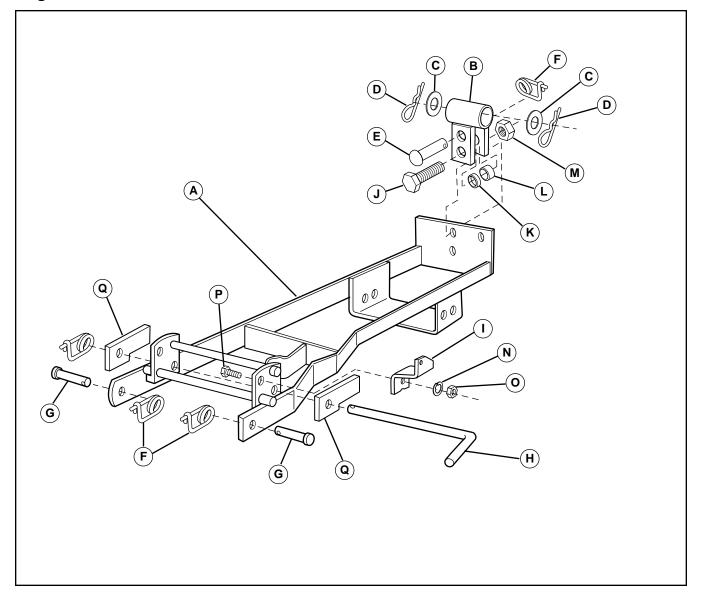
B. Mfg. No. 1692624 Hitch Assembly
